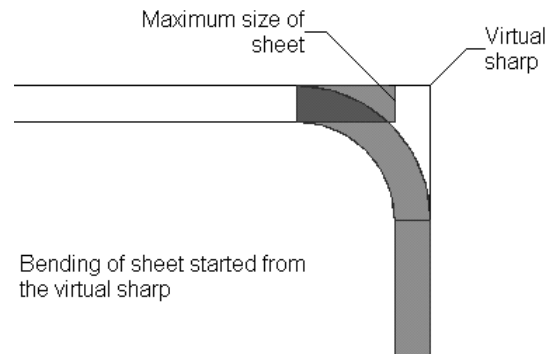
Edge flange created with the Bend from Virtual Sharp button chosen
